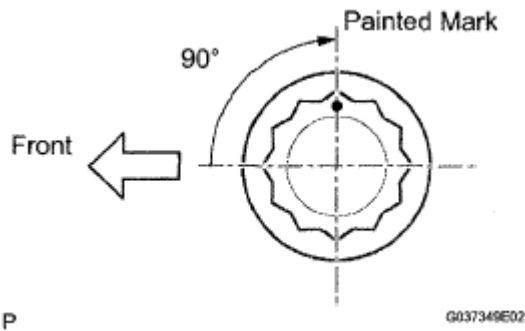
Marking Front Side Of Connecting Cap Bolt With Paint
